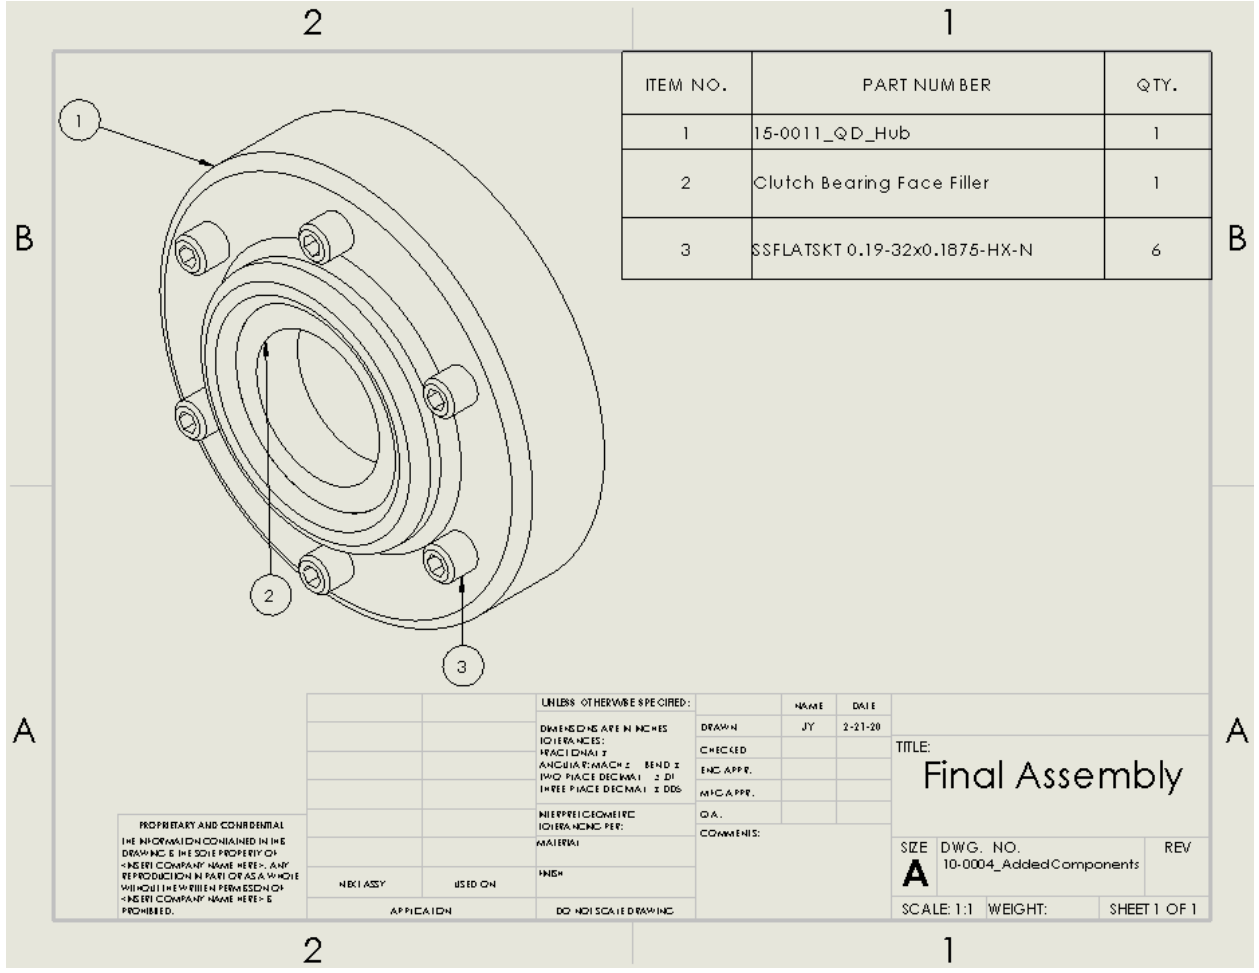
The assembly above includes all of the components this project added to the electrical vehicle.
